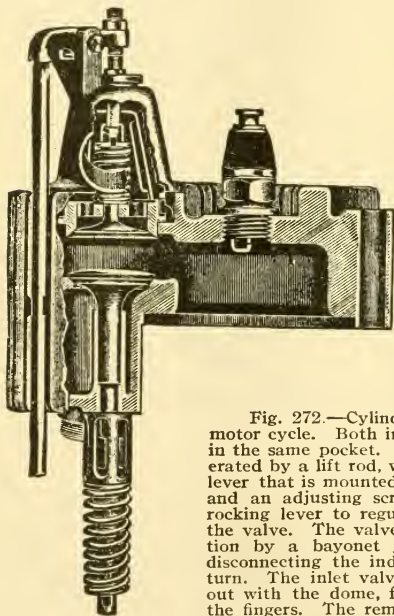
Cylinder head and valves of the Indian motor cycle. Both inlet and exhaust valves are placed in the same pocket. The inlet valve of the twin is operated by a lift rod, worked by the cam, and a rocking lever that is mounted on the dome of the valve chamber and an adjusting screw is provided in the end of this rocking lever to regulate the amount of the opening of the valve. The valve chamber dome is secured in position by a bayonet joint, and may be removed, after disconnecting the induction pipe, by giving it a quarter turn. The inlet valve, with its seat, spring, etc., come out with the dome, from which they are withdrawn by the fingers. The removal of the dome exposes the exhaust valve for inspection.
